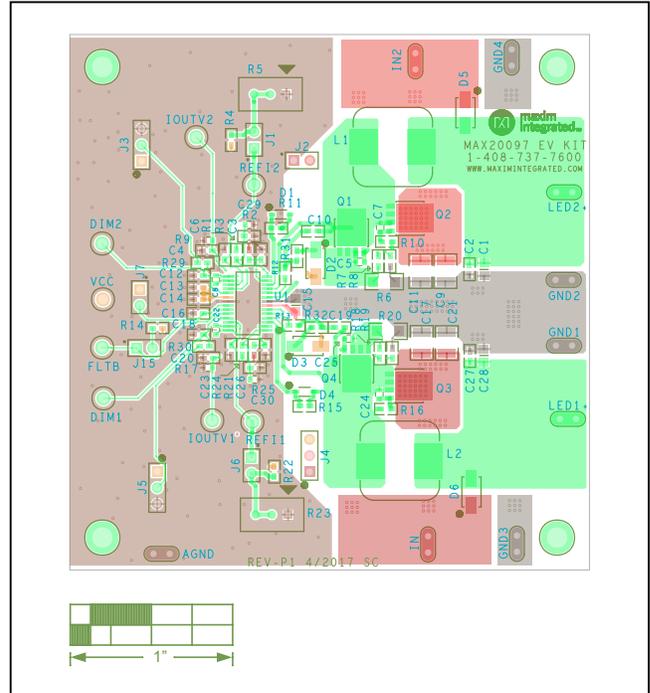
MAX20097 EV Kit PCB Layout—Top Layer
